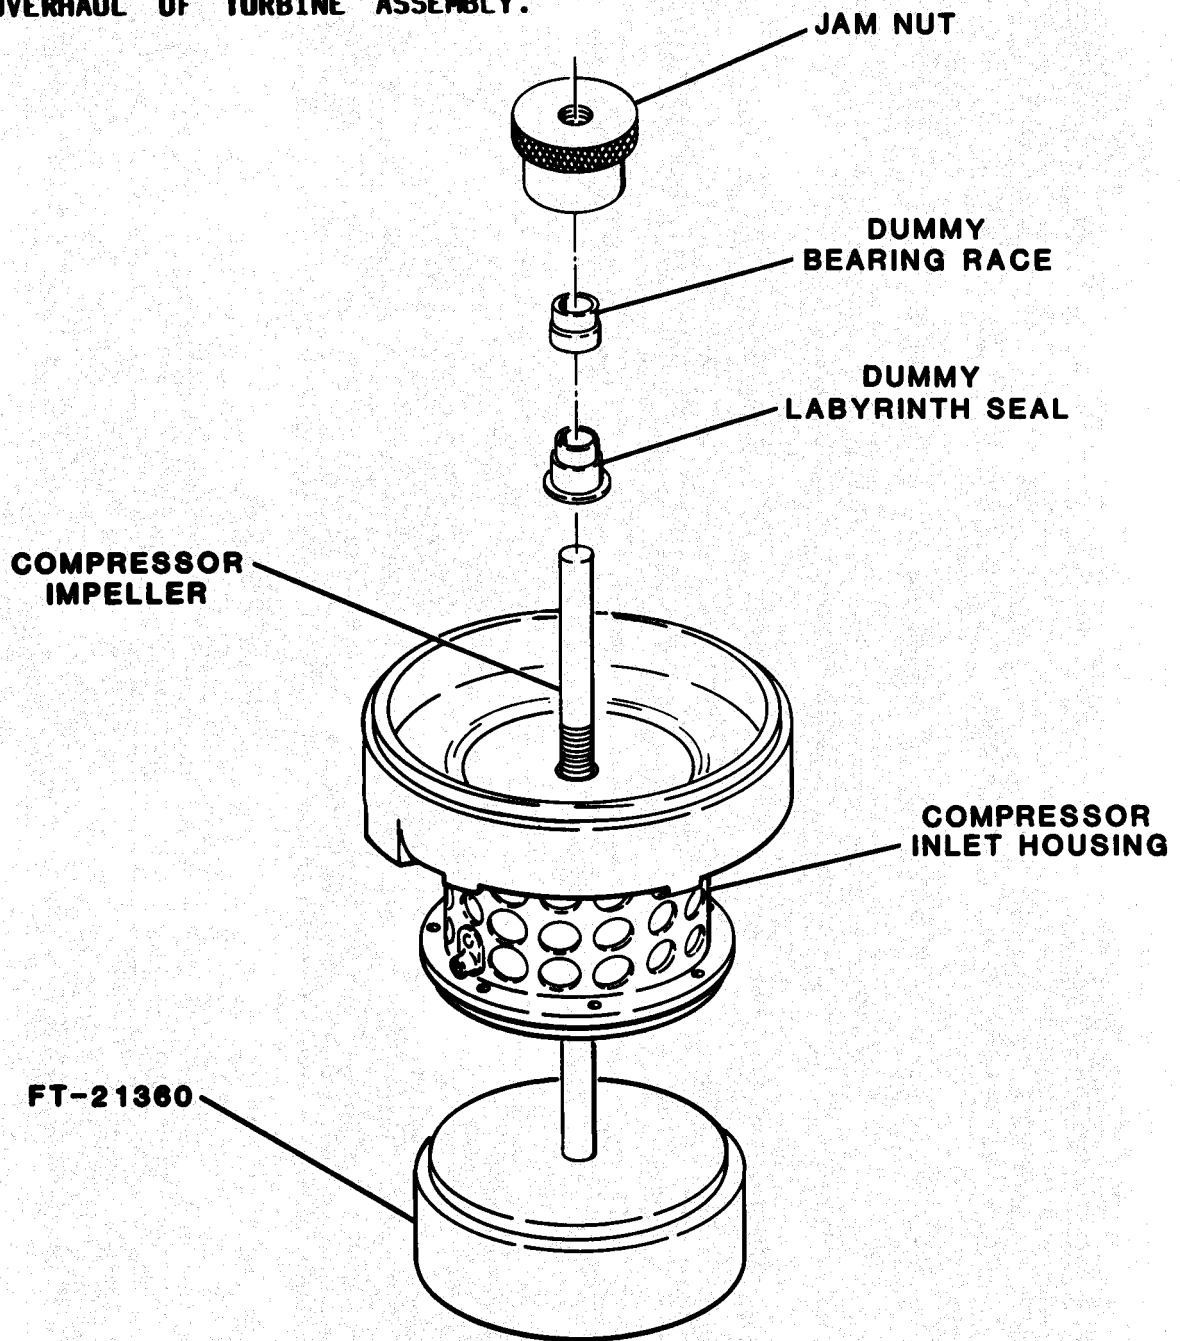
Measuring Compressor Impeller Vane Clearance Using Fabricated Tool FT-21360
